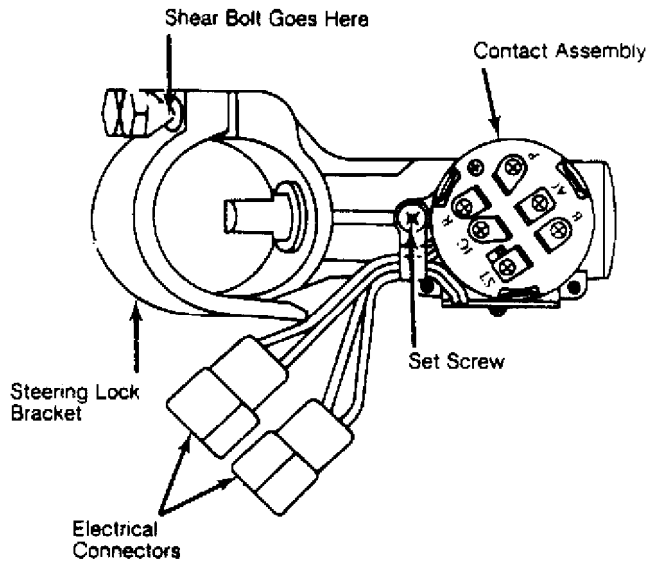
Exploded View of Ignition Switch (Except Pickup)
